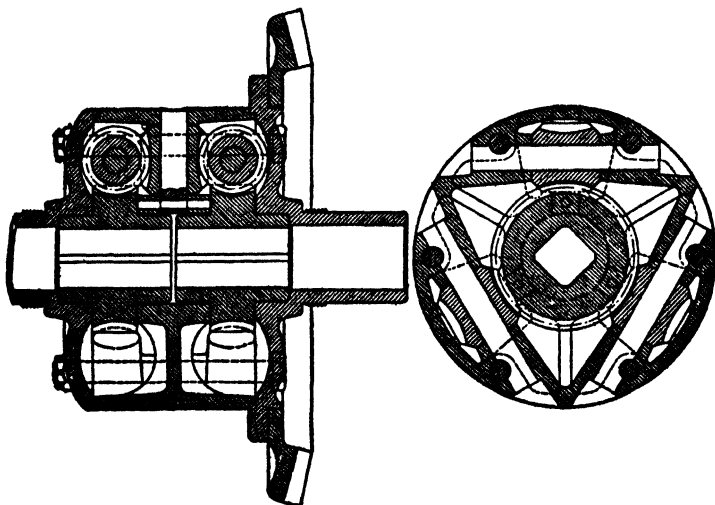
M. & S. NON-SLIP DIFFERENTIAL GEAR.
